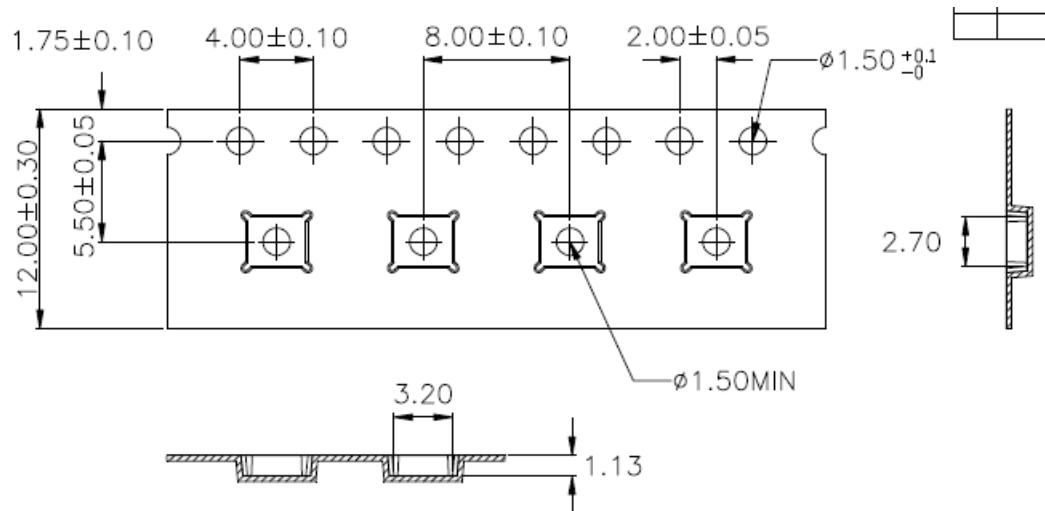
2.5 x 3 mm² Tape Dimensions (TYPE II) (for special request only)
